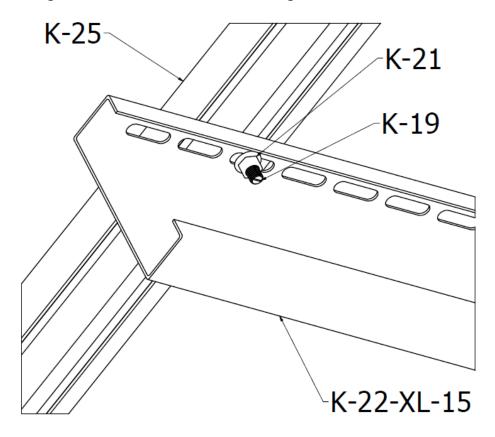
Assembly of K-01 profile to K-22-XL-15 coir
